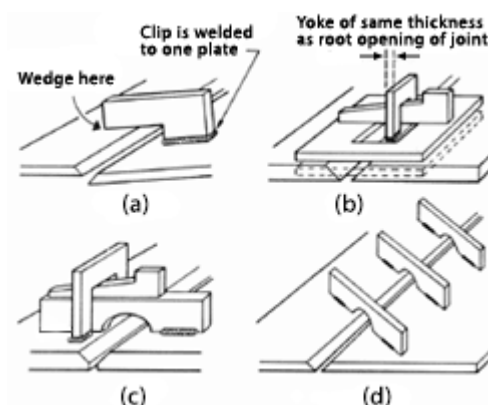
Strongback used in butt welding process (Lincoln electric)
